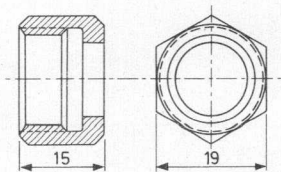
Cap nut type TE1051b (thread 3/8 in gas).
